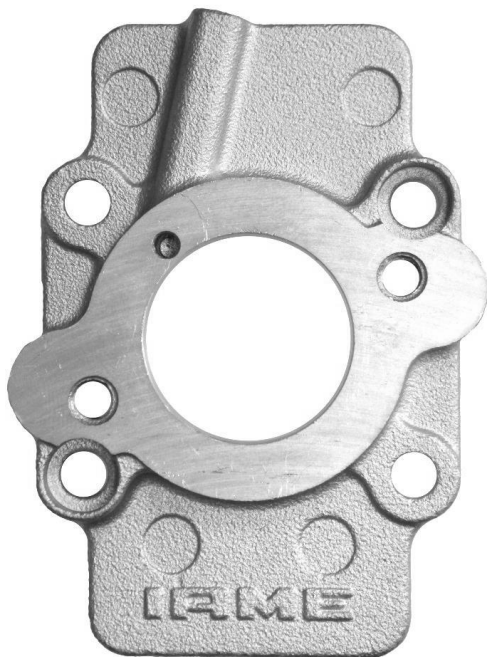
PHOTO IDENTIFICATION CARBURETTOR INLET CONVEYOR
